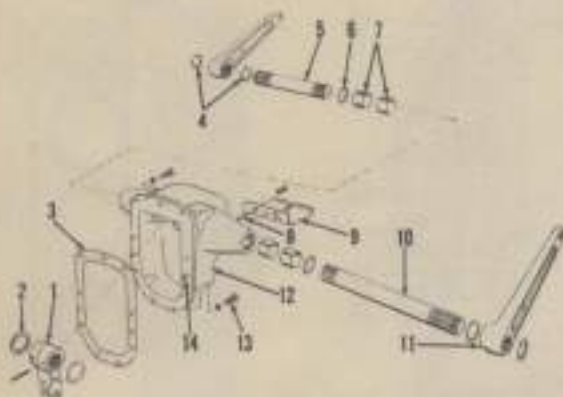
Exploded view of lift arms, lift shaft (rockshaft) and housing.
